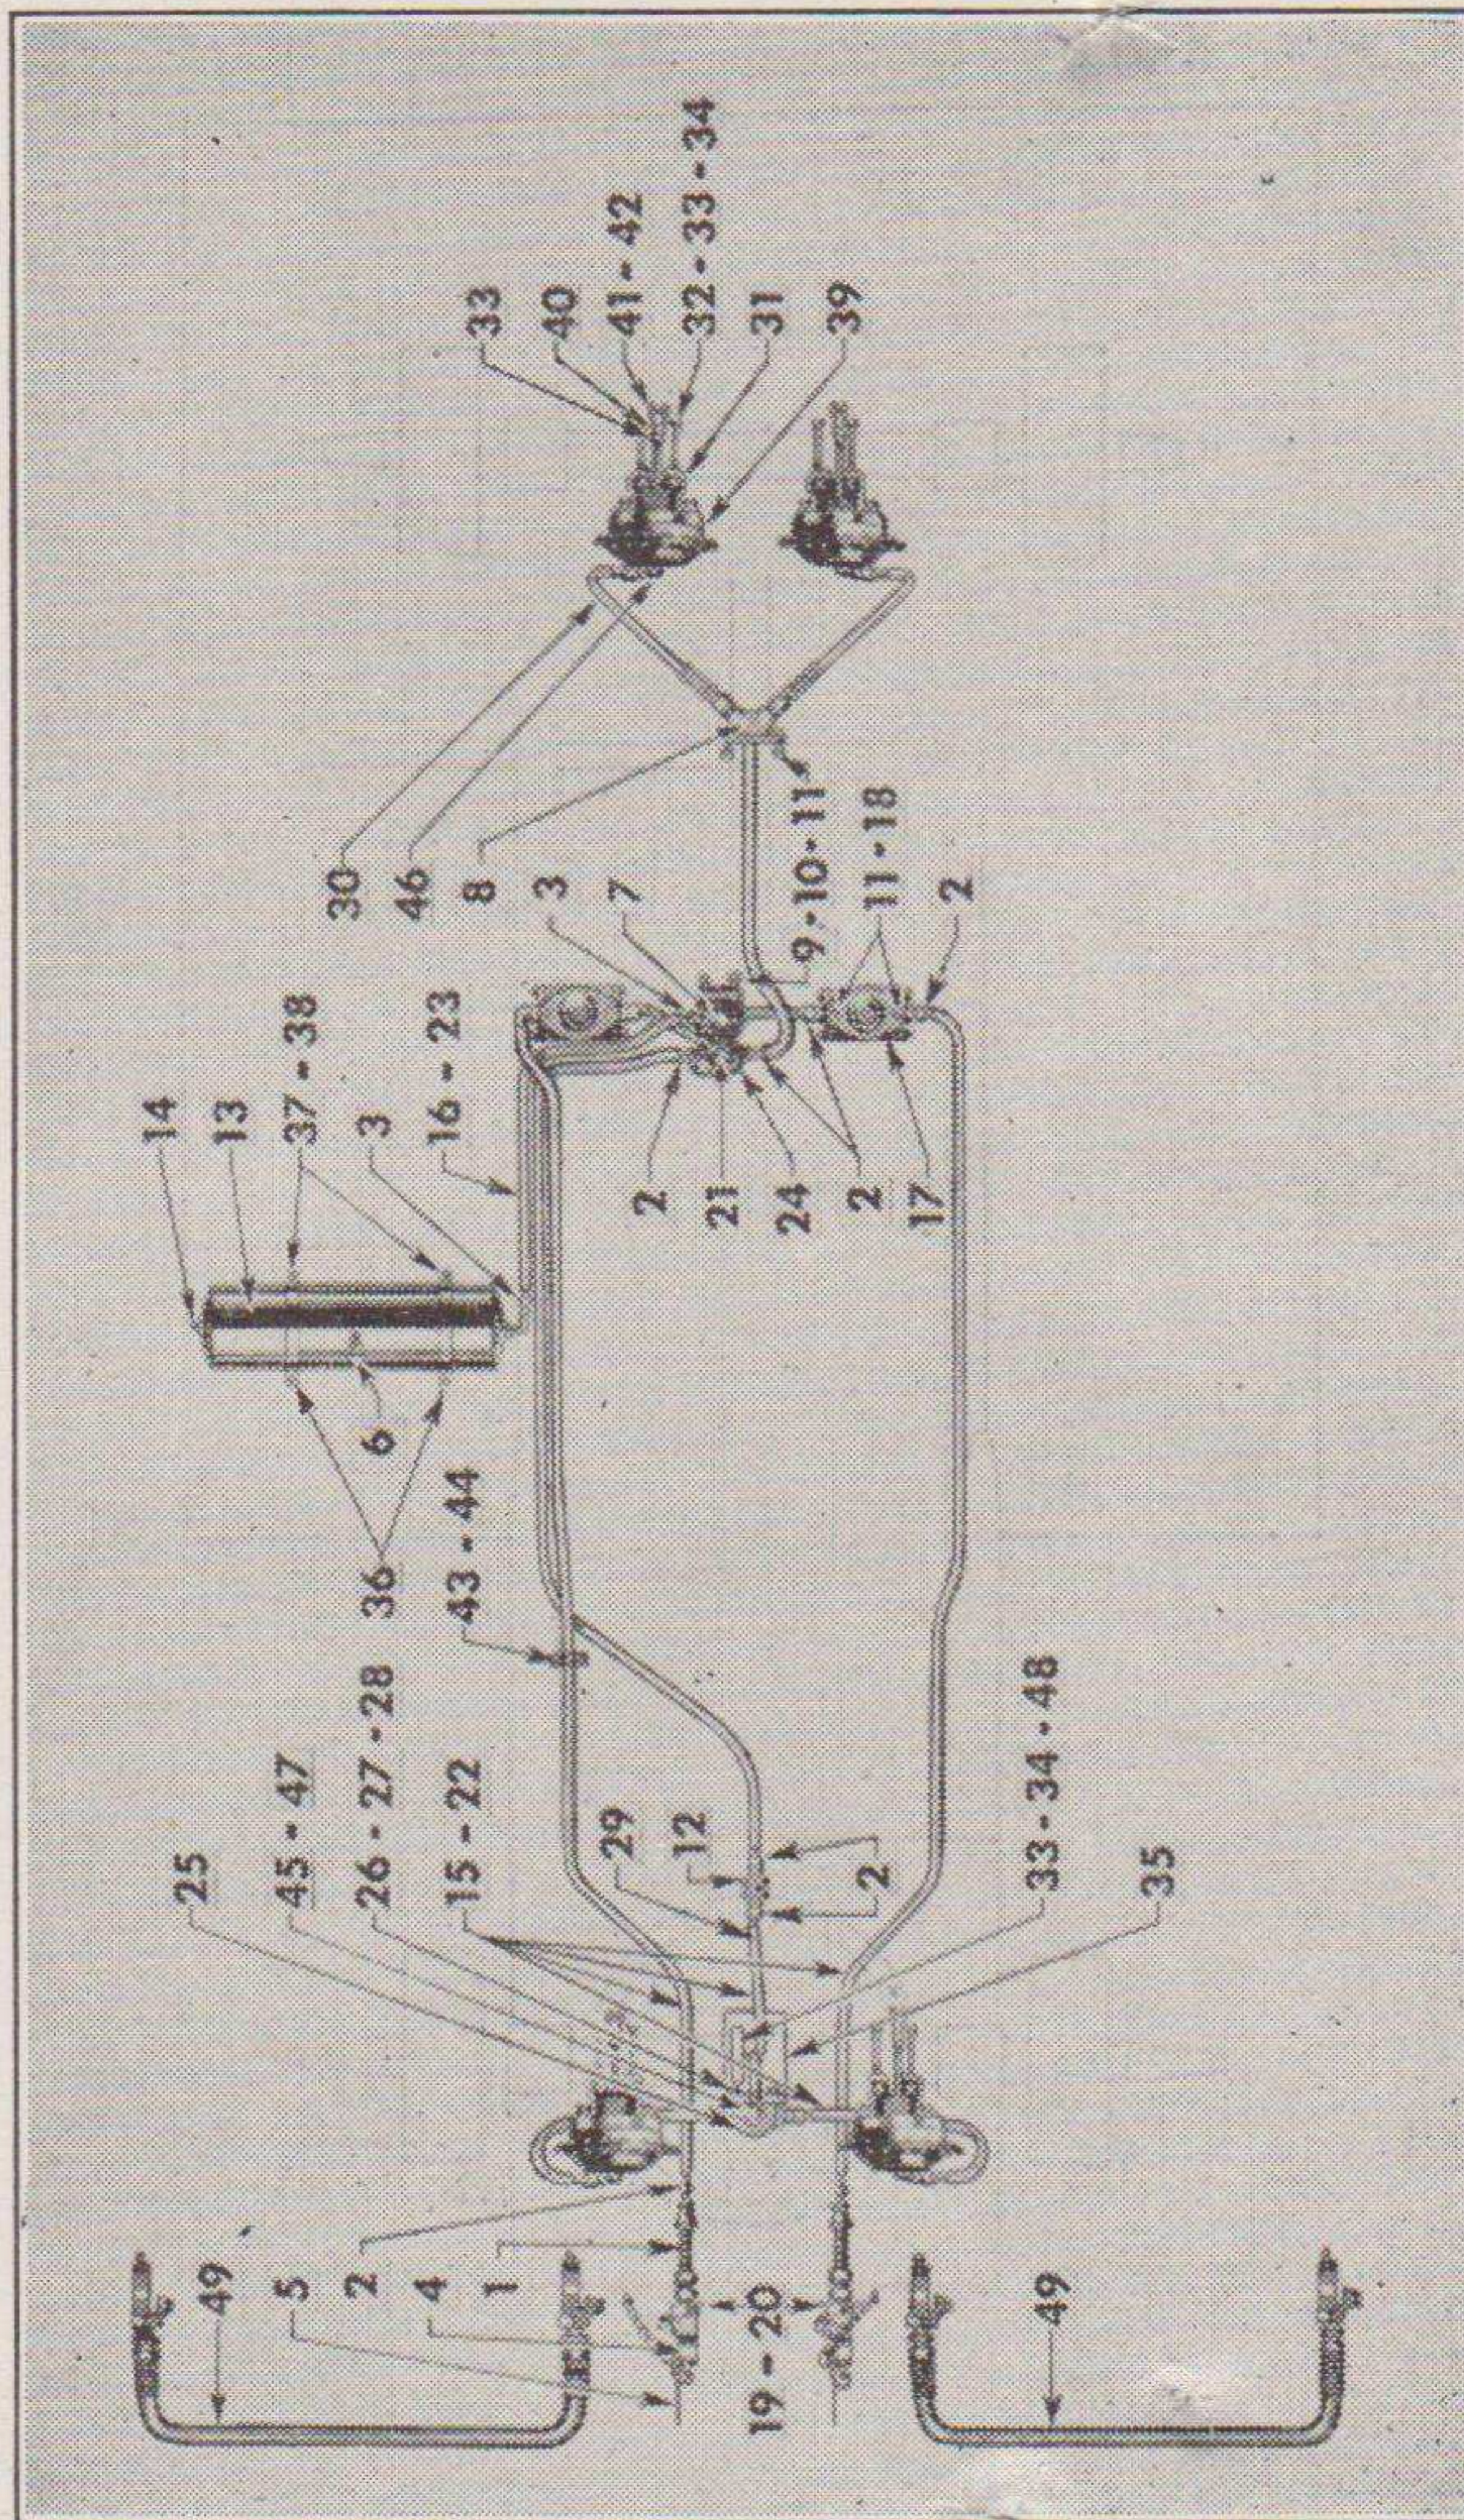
BRAKE OPERATING PARTS ASSEMBLY
